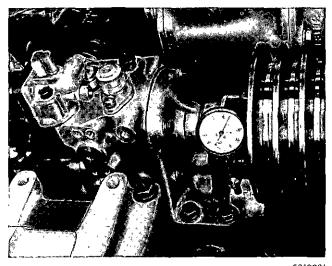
Mounting fuel pump — V8-350/VT8-430
